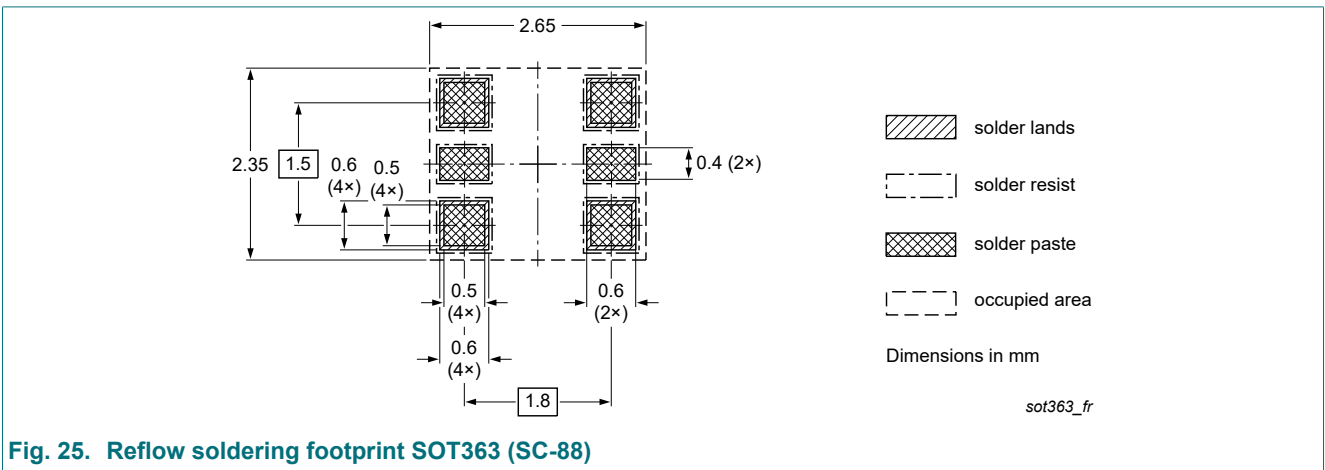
Reflow soldering footprint SOT363 (SC-88)
